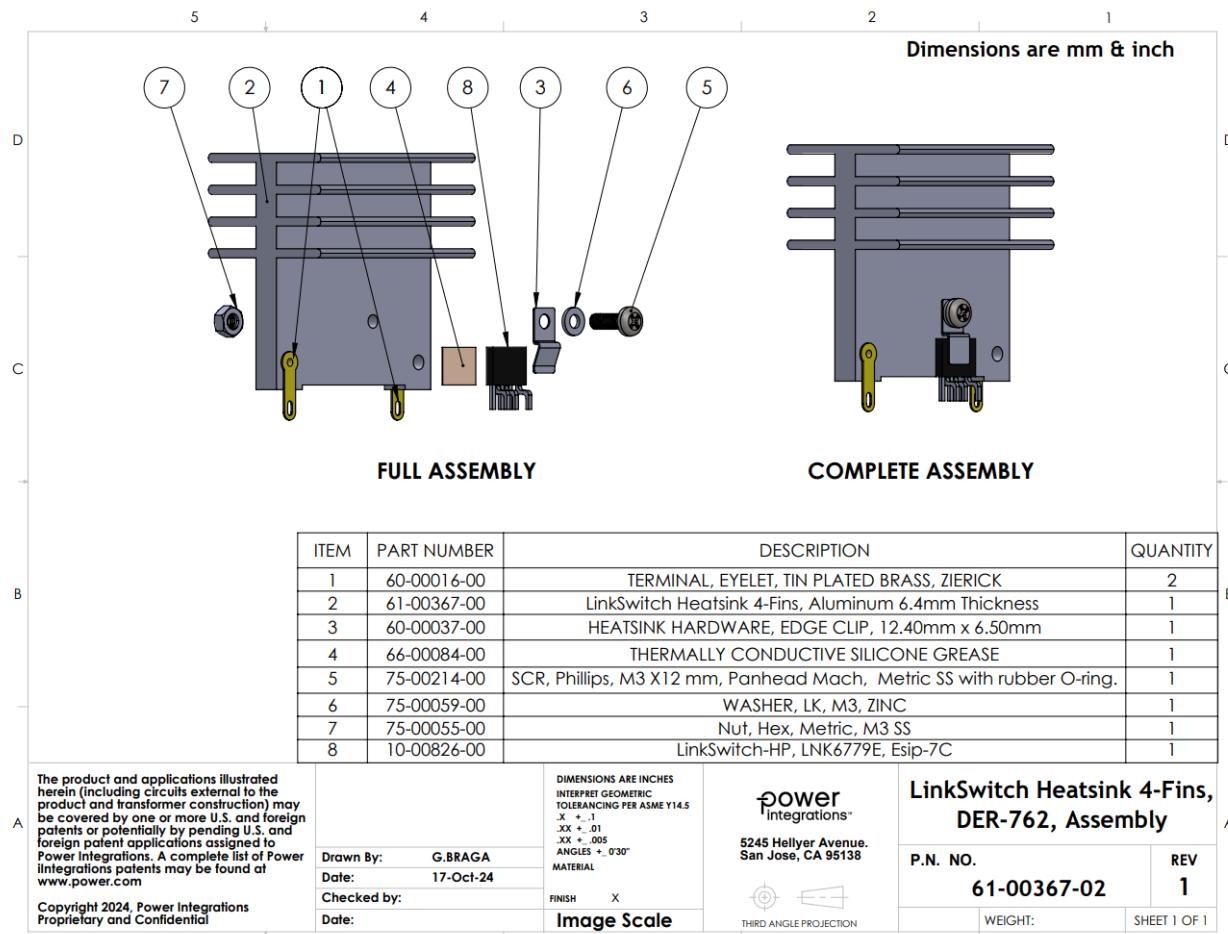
DER-762 LinkSwitch-HP Heat Sink Assembly.
